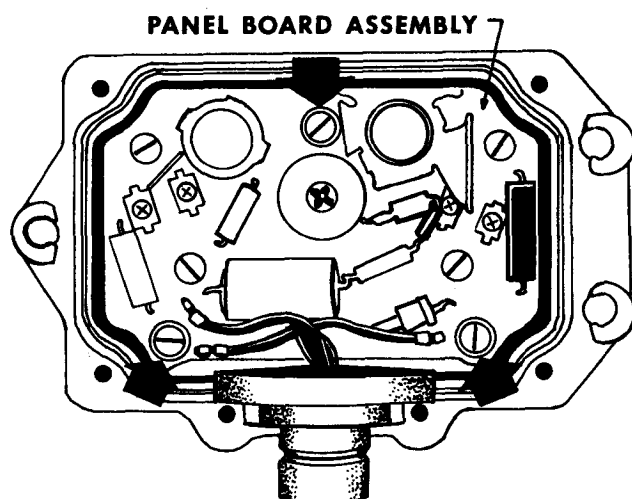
Underneath side of regulator with bottom plate removed. Arrows identify panel mounting screws.
